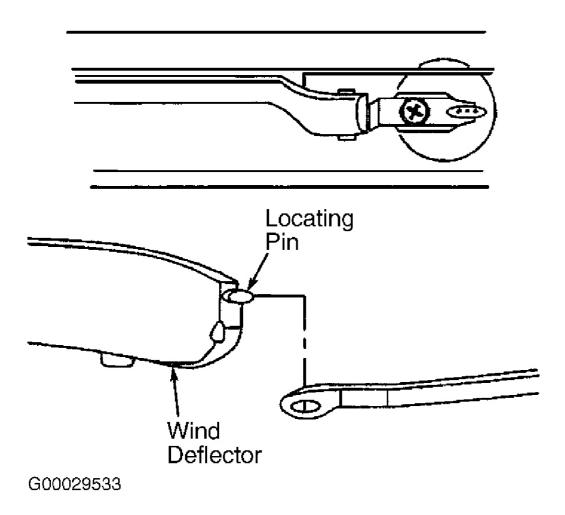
Removing & Installing Wind Deflector Courtesy of GENERAL MOTORS CORP.
